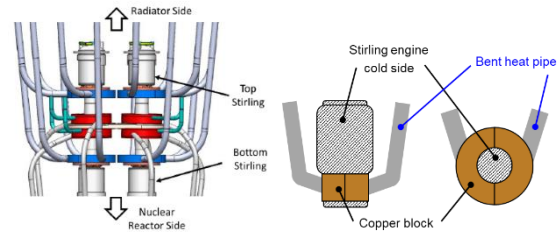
Connection of heat pipe and cold side Stirling engine. [1]
